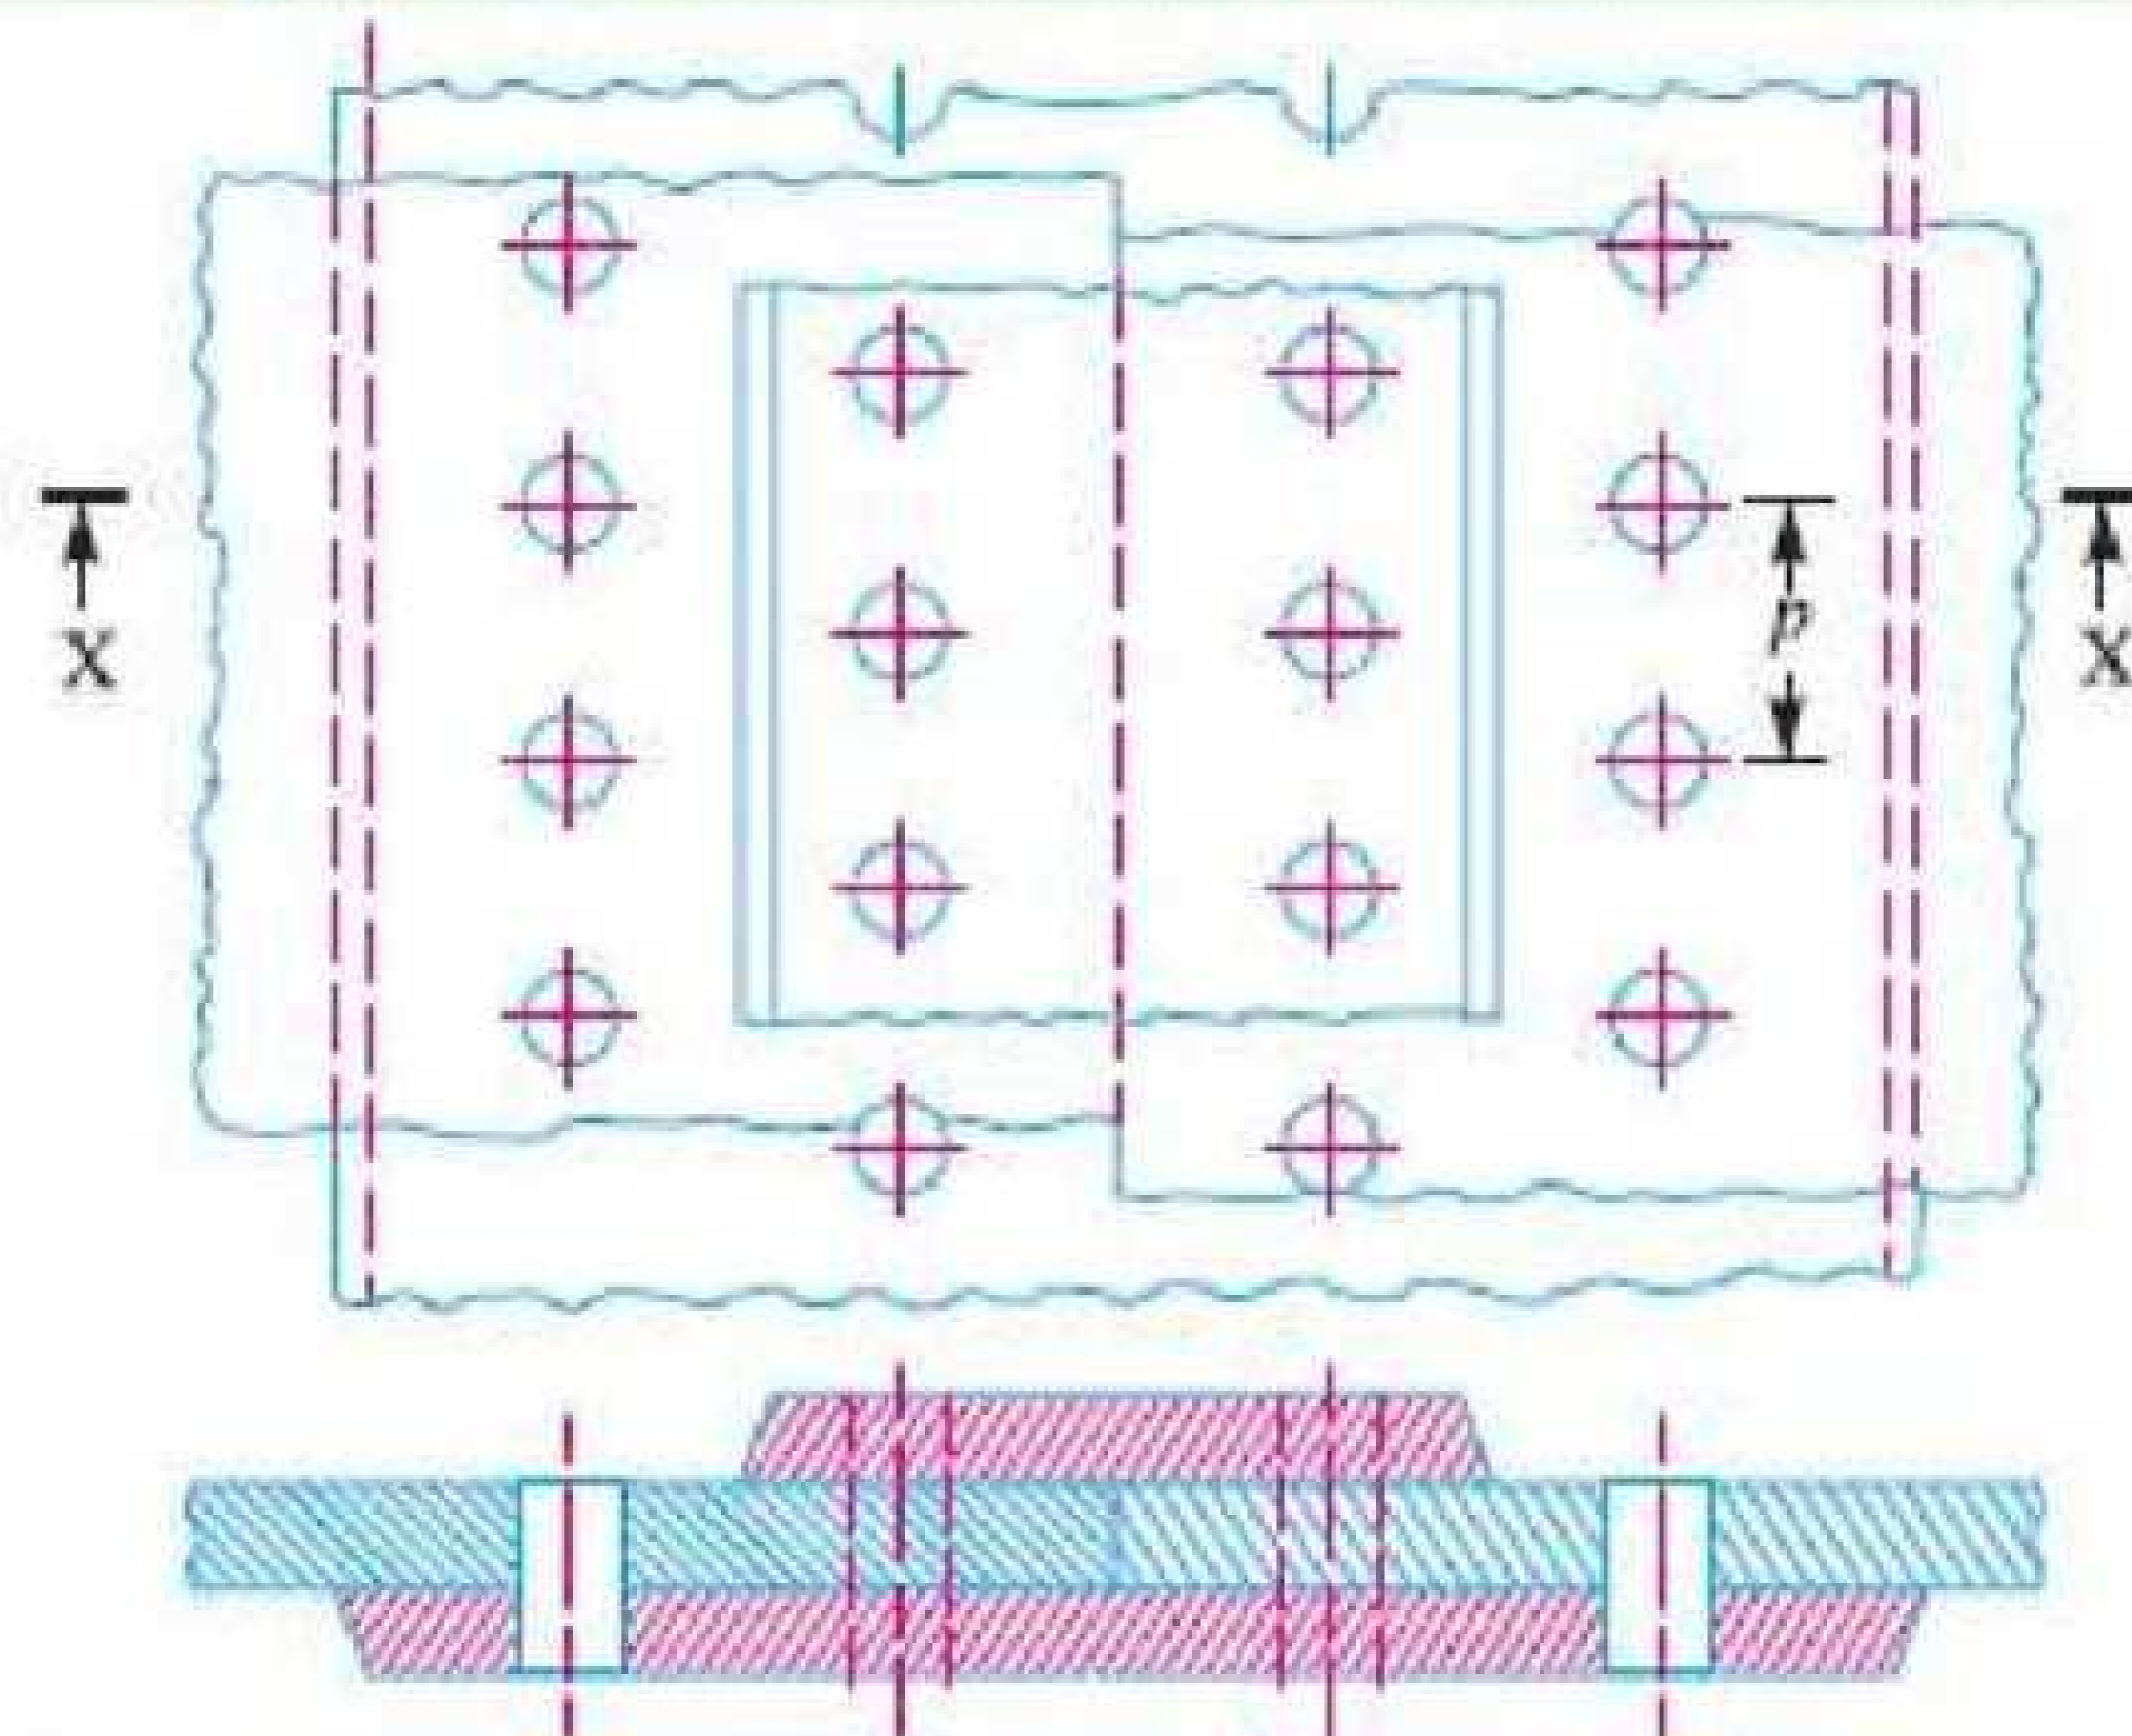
Double riveted double strap (unequal) butt joint with zig-zag riveting.
